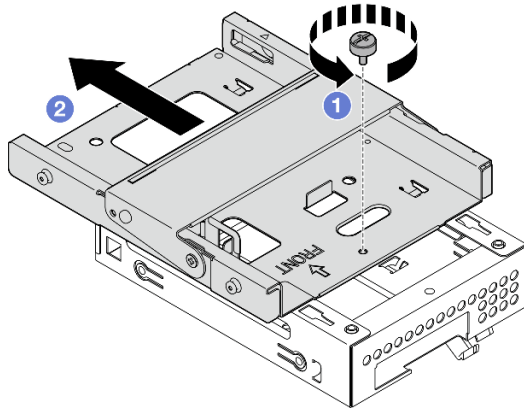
Removing the optical drive cage from the bay 2 drive cage
